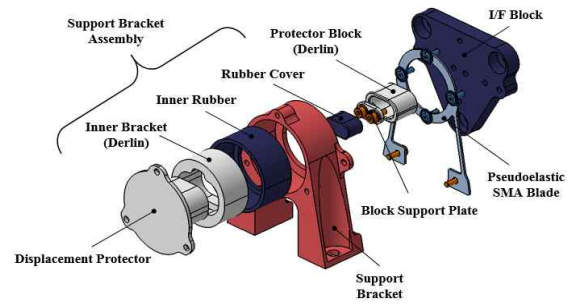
Exploded View of the Pseudoelastic SMA Blade Isolator[7]
